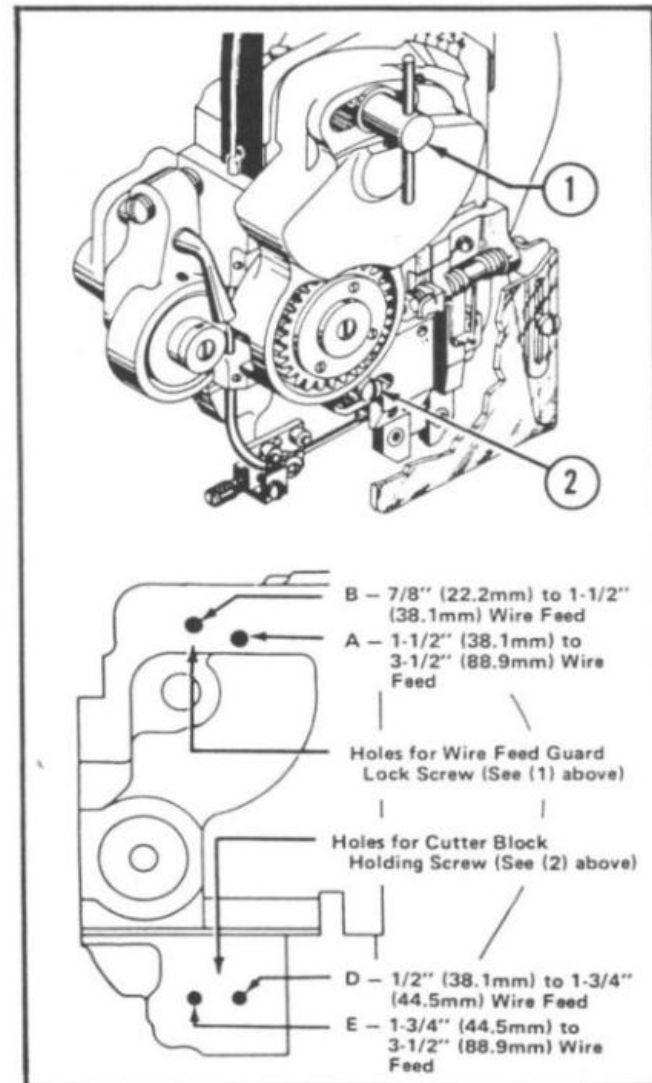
Positioning Wire Feed Lock Screw and Cutter Block Holding Screw
